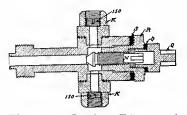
Section Through Holder Valve No. 53b, Fig. 2108.
